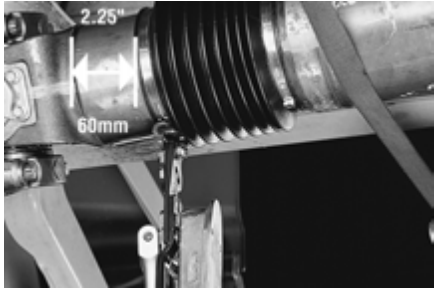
POSITION THE END OF THE BOOT AT THE 2.25 INCHES (55-60MM) MARK MADE ON THE YOKE SHAFT SHOULDER
